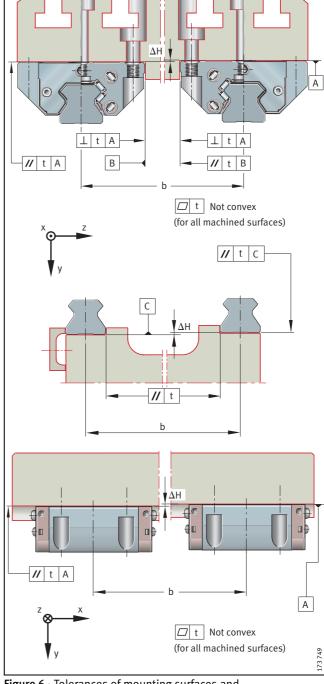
· Tolerances of mounting surfaces and parallelism of mounted guideways
